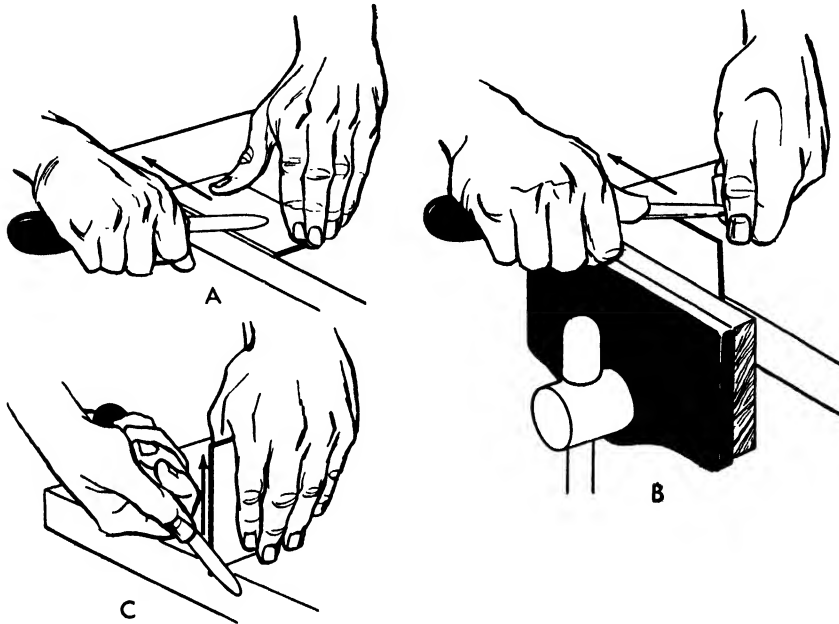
Forming the scraping burr on a scraper. Draw the burnisher over the edge three or four times, use moderate pressure, and keep the burnisher flat against the scraper as at A. Then turn the burr with three or four strokes as at B or C. (See also Fig. 7-33.) A little oil on the burnisher makes it work better.
